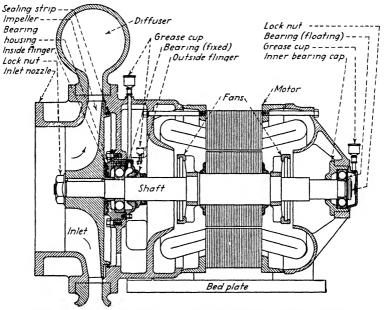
Mechanical details of a single-stage motor-driven blower.
